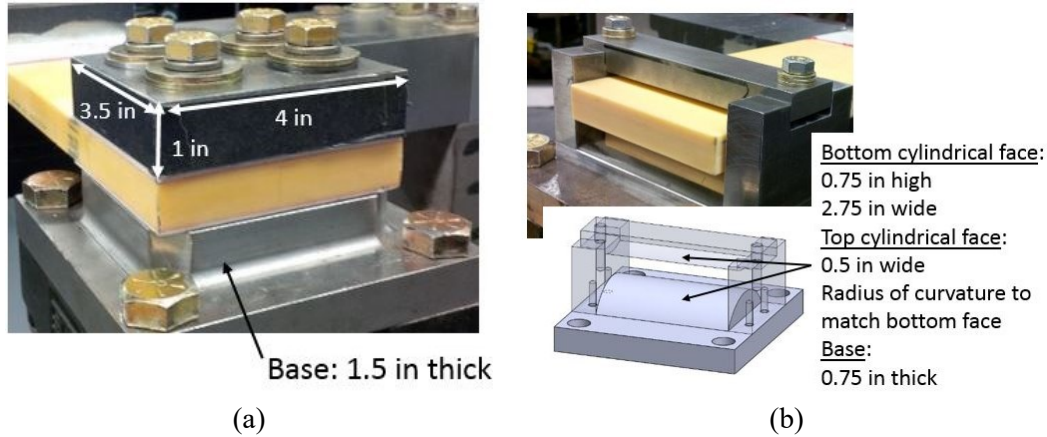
Loading fixtures for (a) clamped and (b) cantilever configurations
